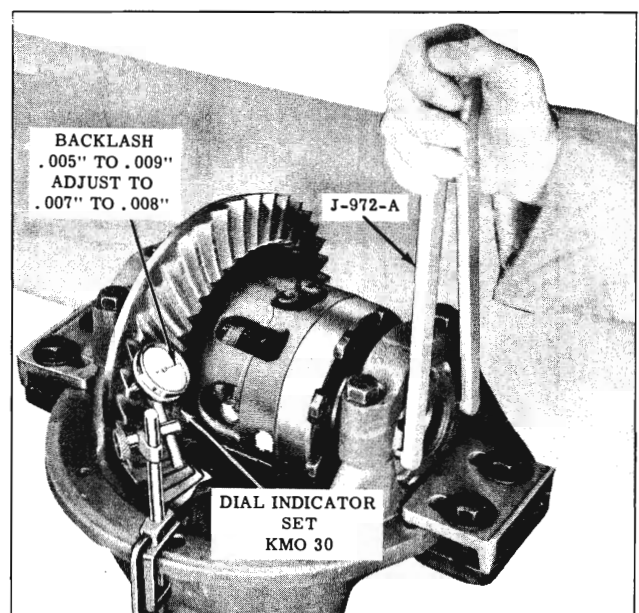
Adjusting Backlash (Anti-Spin Shown)
